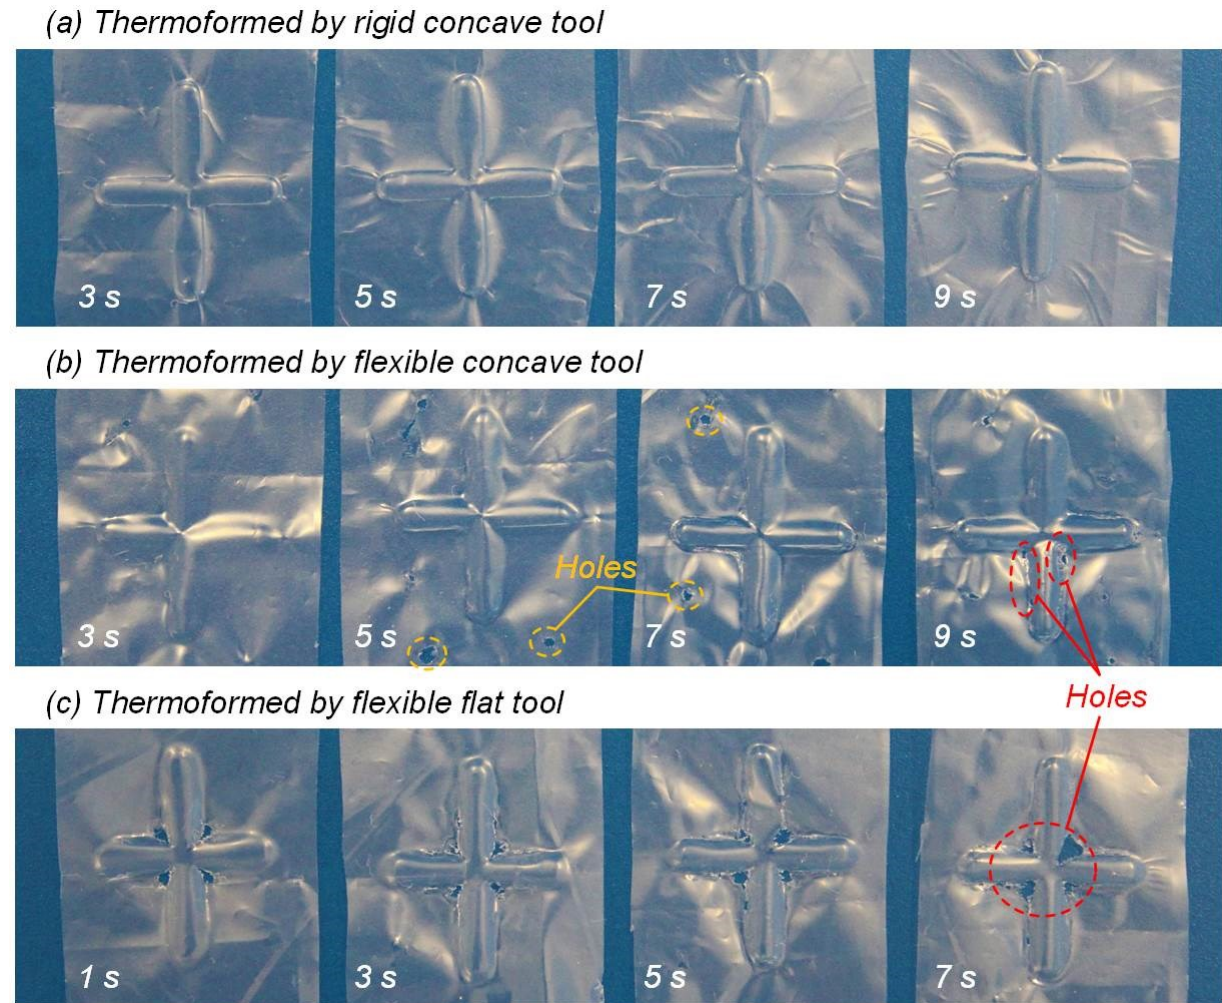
Photos of thermoformed 20 μm thick PP foils with help of buffer foils by rigid concave tool (a), flexible concave tool (b), and flexible flat tool (c) with different duration of ultrasonic vibrations.
